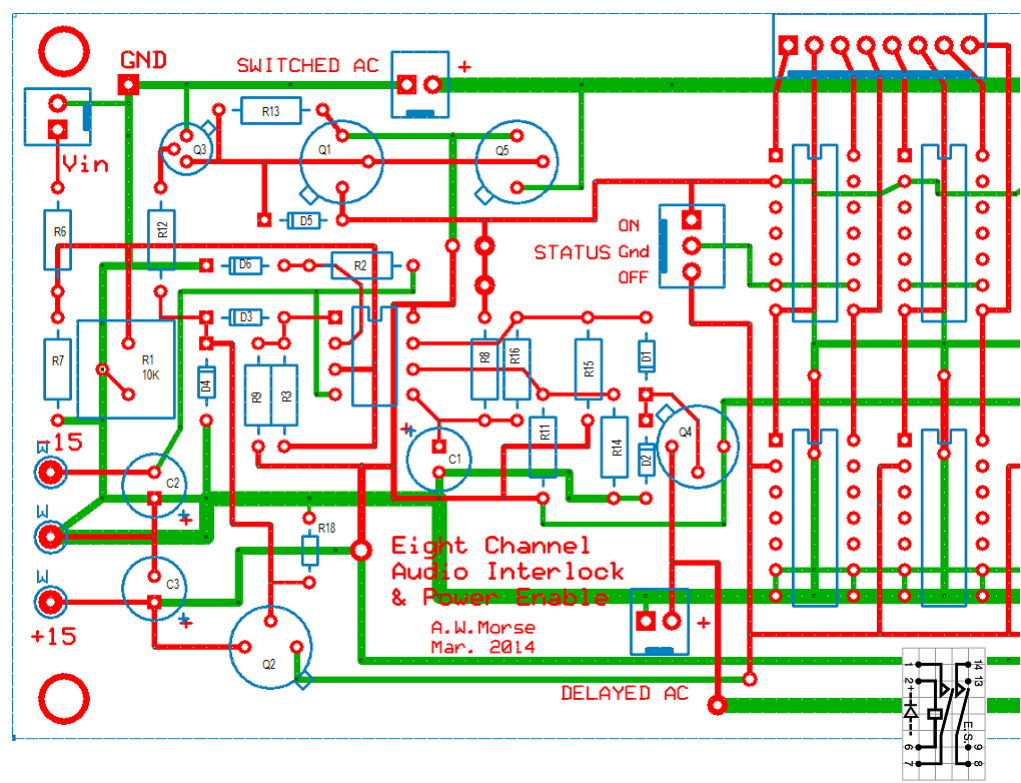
Component Identification of the Audio Interlock Assembly
